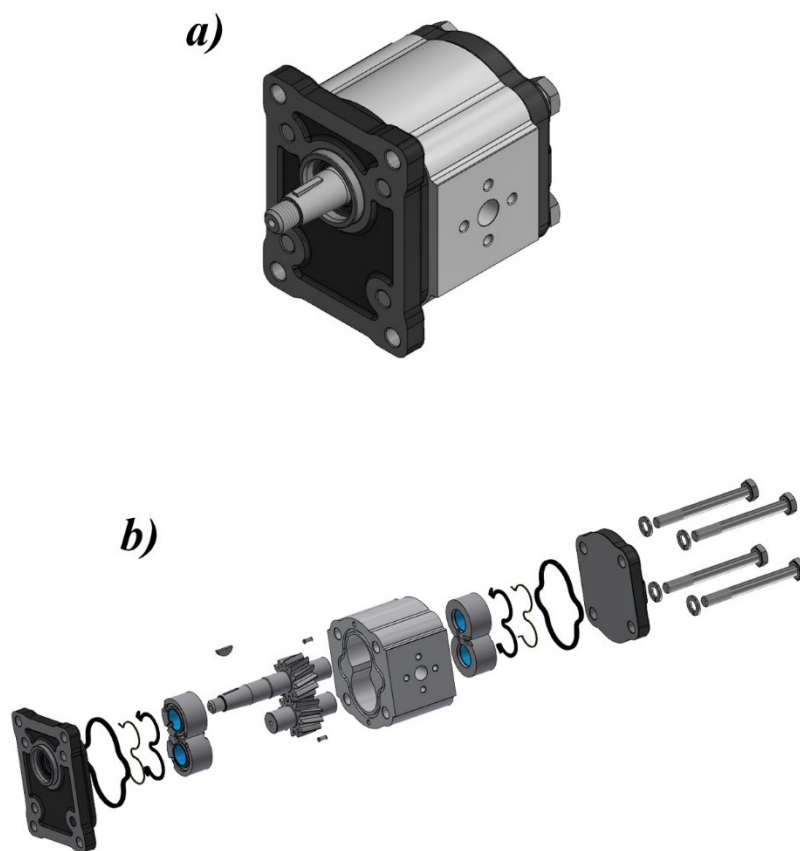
a) Assembly of the reference helical gears pump; b) Exploded view
